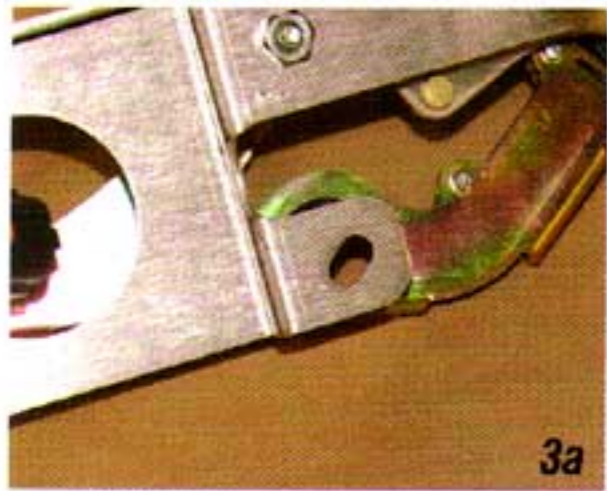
& 3b & 3c: There is a tab on the wiper motor that will need to be bent for the 1955 cars. Using two pair of vise grips or channel locks bend the tab up 30-degrees.
